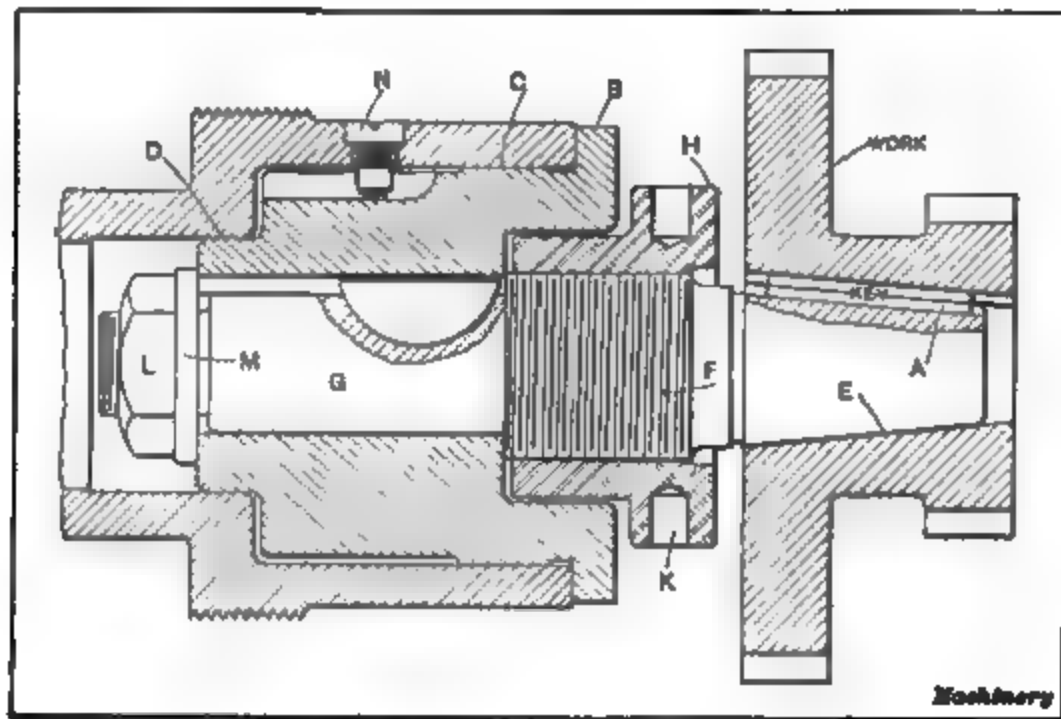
Taper Arbor mounted in Spindle and equipped with Nut for removing Work
